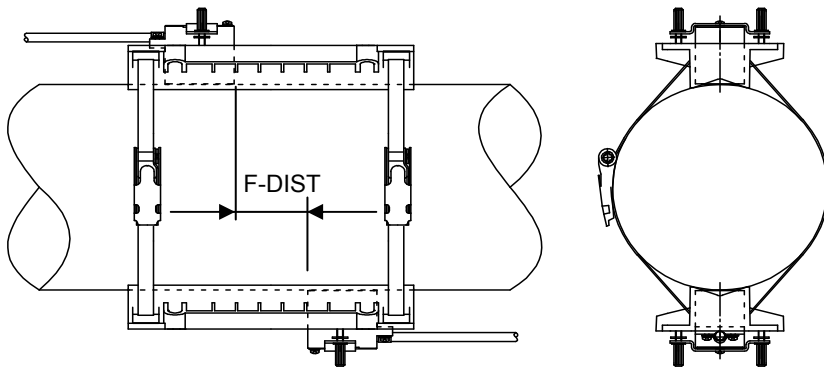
B: Mounting method for a pipe size of DN65mm or more and a mounting interval of less than 50 mm
